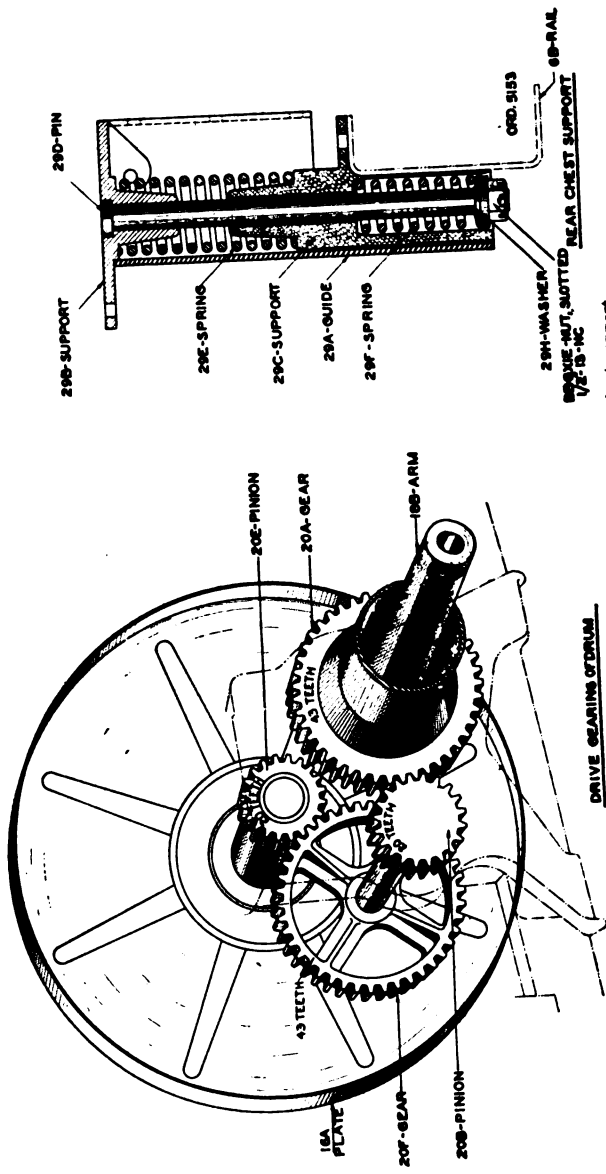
Battery reel, M1917, drive gearing and rear chest support
